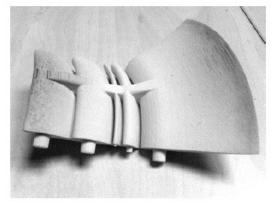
Previously 3D printed parts of the casing  $v_{II}$ , [16]
